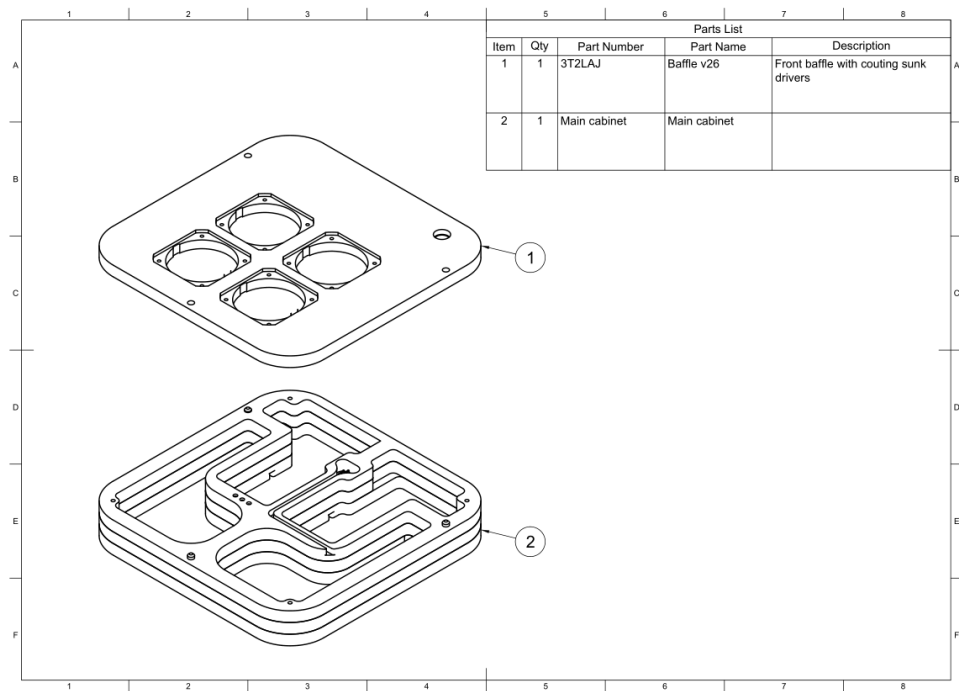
Exploded view of all the parts needed to mount the baffle to the main cabinet.
